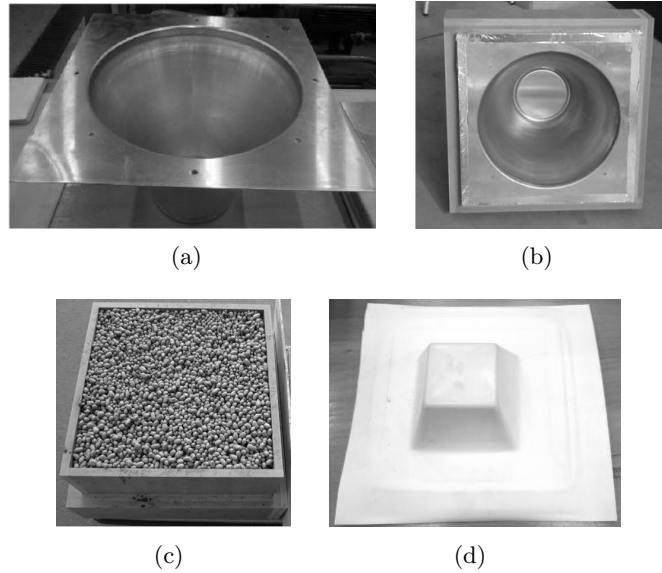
Thermoforming mold created by SPIF: (a) ISF sheet part, (b) mold inside a MDF box, (c) box filled with a porous mixture casted to provide support, (d) plastic part fabricated in the mold
